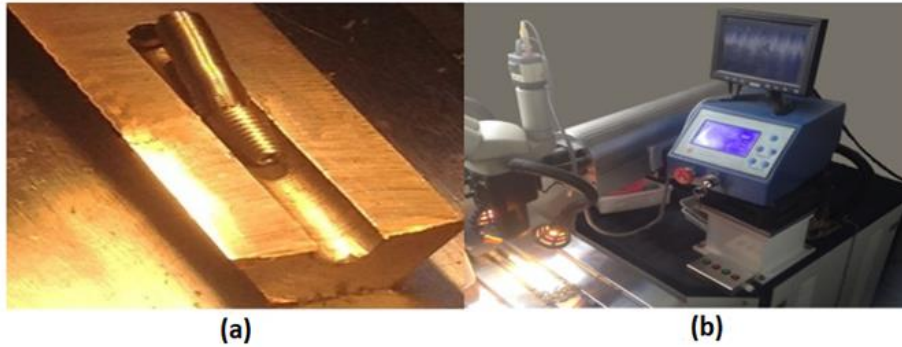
a) Welding of resistance wires b) Laser device
